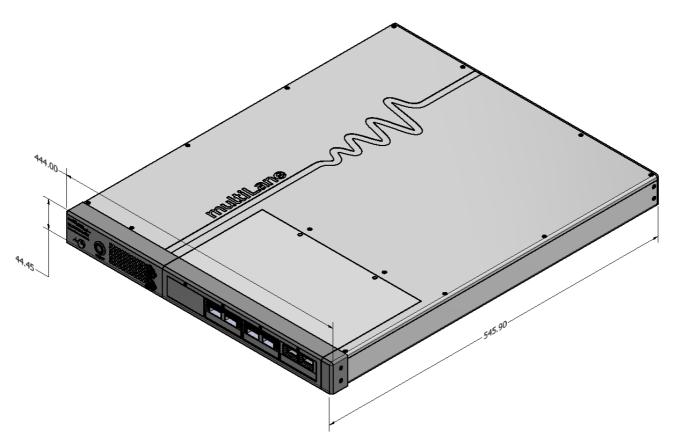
ML7064E-L-UMT Mechanical Dimensions
